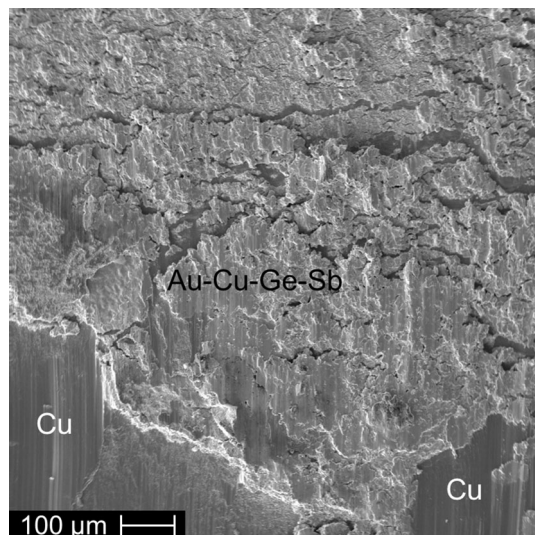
Fracture surface of a Cu/Au-15Ge-17Sb/Cu joint
